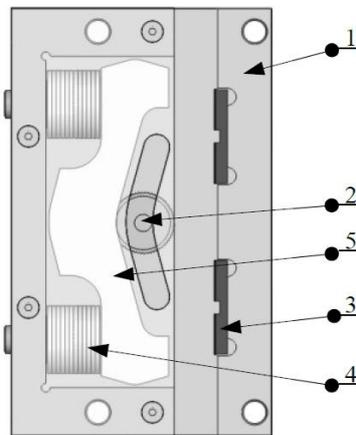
Diagram of CHP2000 type progressive gears: 1 – a body, 2 – a braking roller, 3 – a braking plate, 4 – Belleville springs, 5 – a cam [5]
